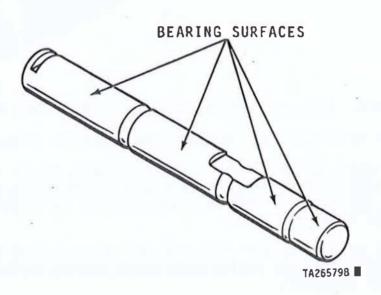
Oil pump impeller driven shaft bearing surfaces.
